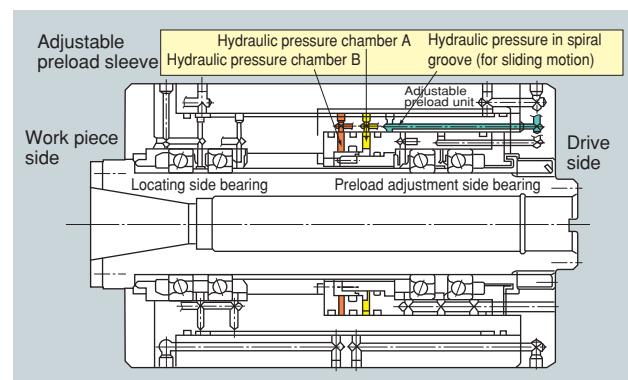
Typical spindle configuration incorporating 3-step Adjustable Preload Type Bearing Unit
